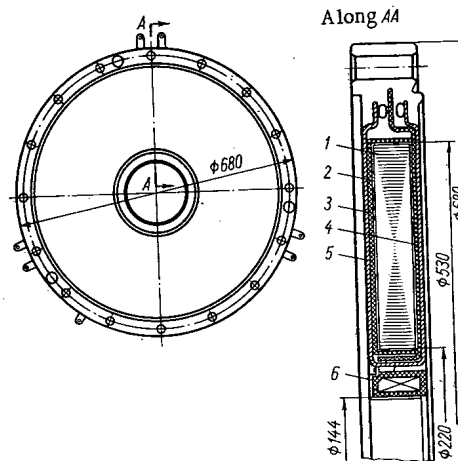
Inductor: 1) core; 2) synthetic rubber; 3), 4) insulating washer; 5) exciting winding; 6) focusing coil.
